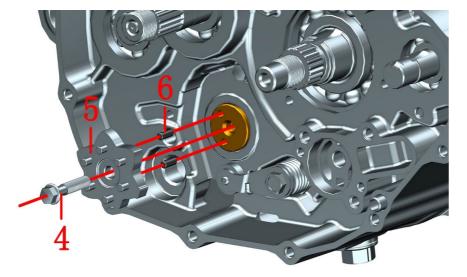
RIGHT CRANKCASE		ZT158MJ shift mechanism assembly-1	CHK
